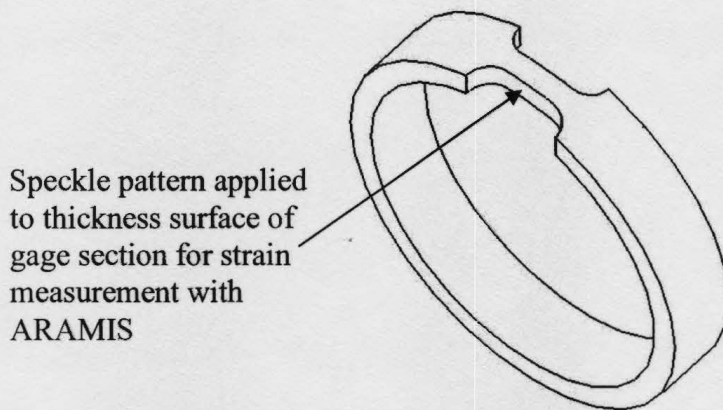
Geometry of ring hoop tension specimen prior to testing.
